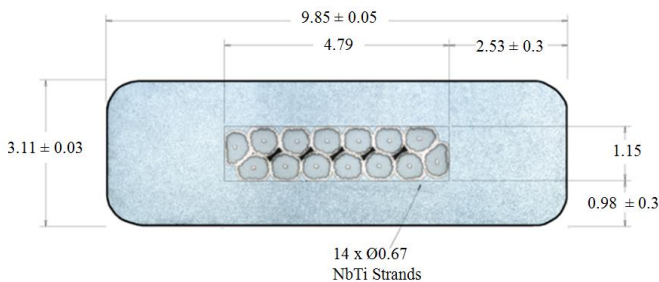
TS Al-stabilized cable cross-section after conforming and cold-work.
